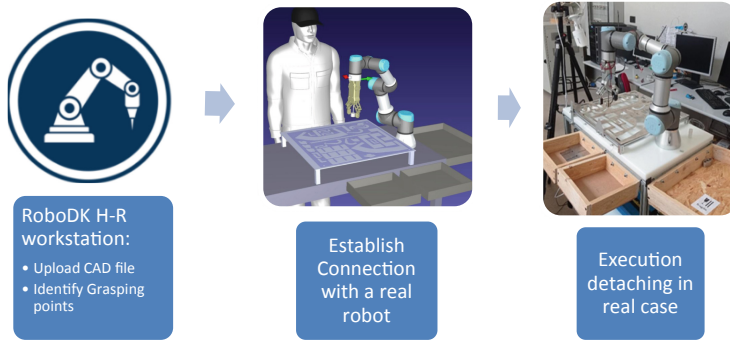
Proposed framework of automated detaching system for laser cutting sheet metal parts
